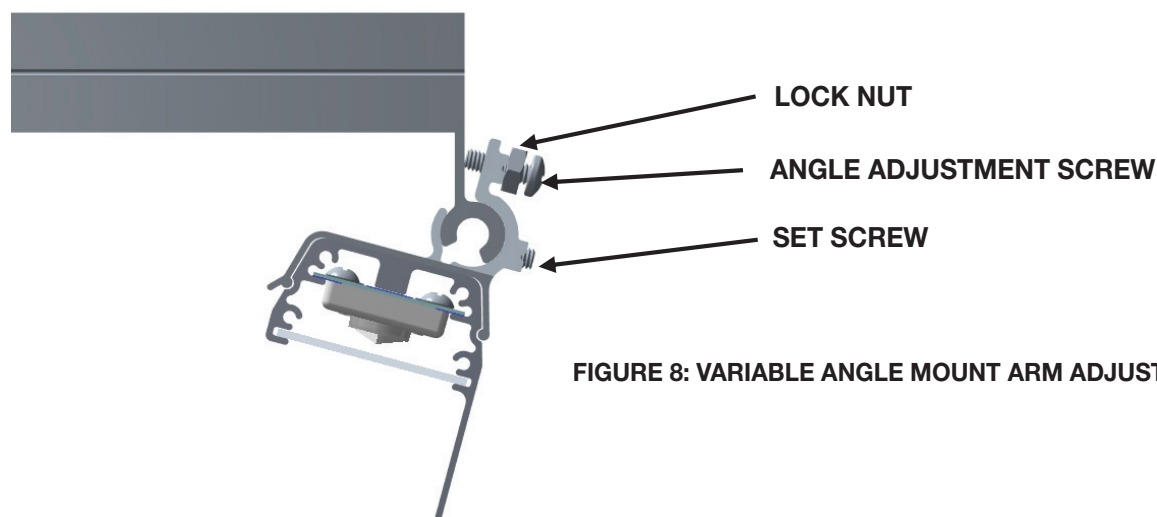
VARIABLE ANGLE MOUNT ARM ADJUSTMENT
